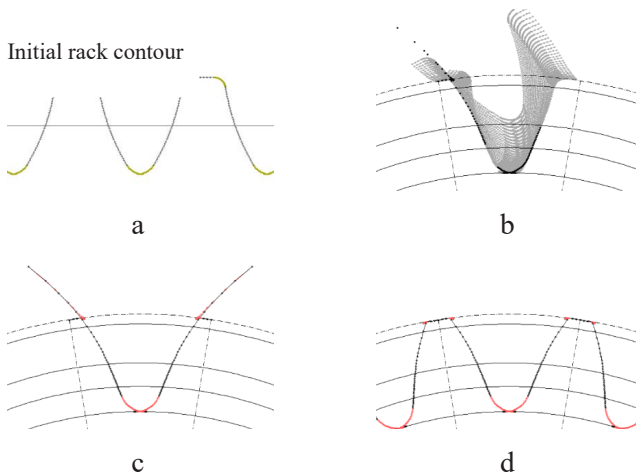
The shaping of the space between the teeth of the gear wheel with $m = 5$ and $z = 20$ by tool rack with a convex profile of the tooth flanks
